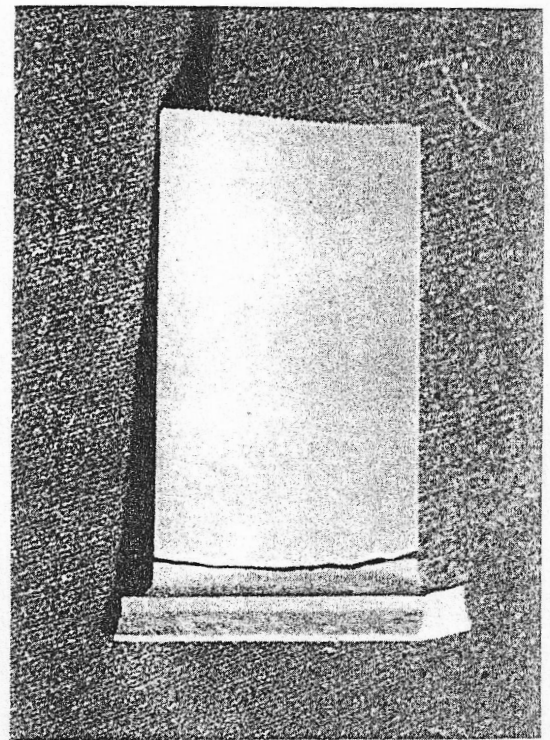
FATIGUE CRACK IN TENTH STAGE STATOR BLADE
